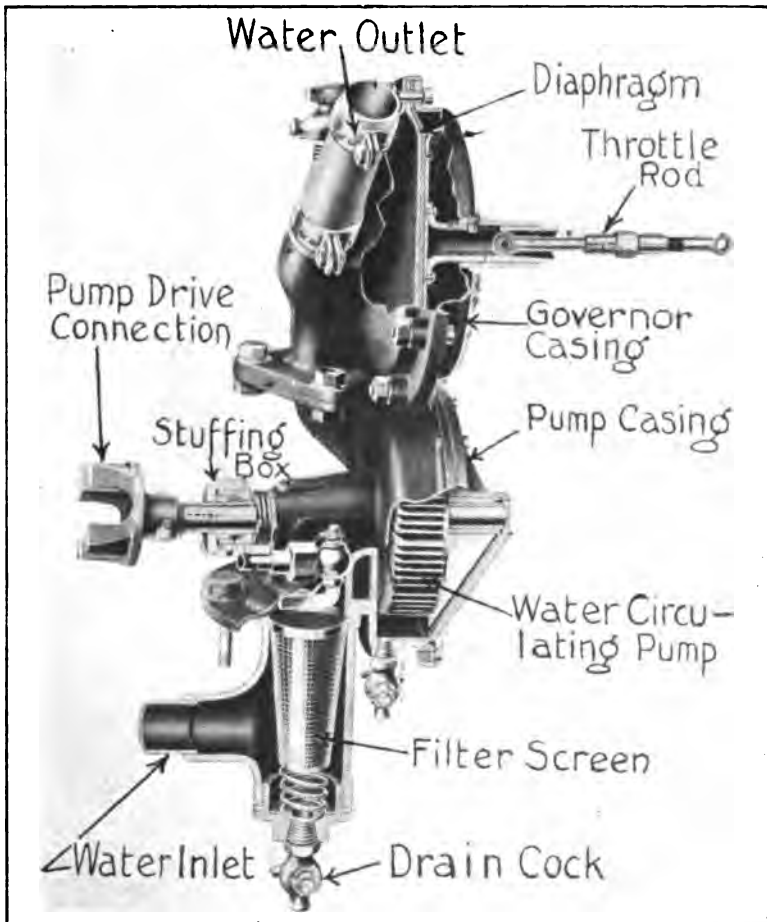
Showing construction of hydraulic governor used on Packard motor cars.
